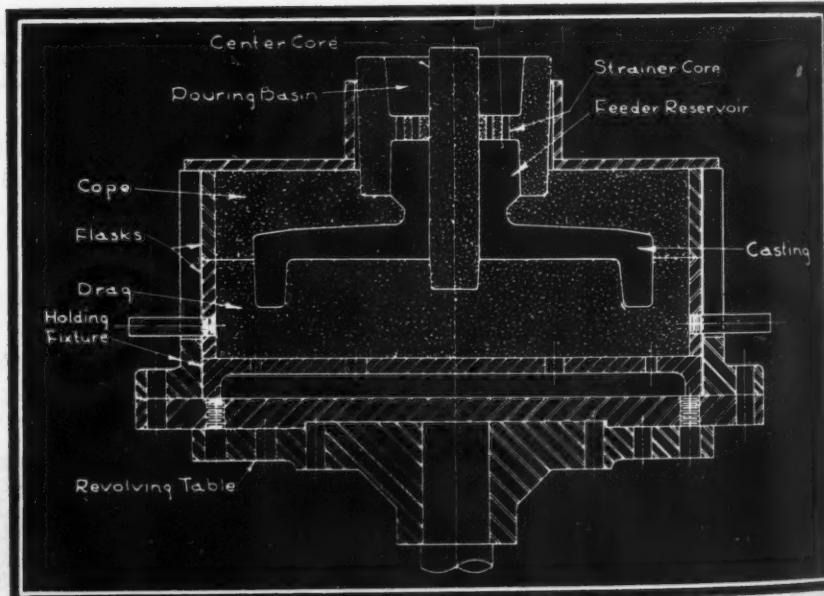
Right—In semicentrifugal casting the center cavity, if any, is formed by a core, and the metal feeds from a reservoir. Part shown in the mold is an engine flywheel
